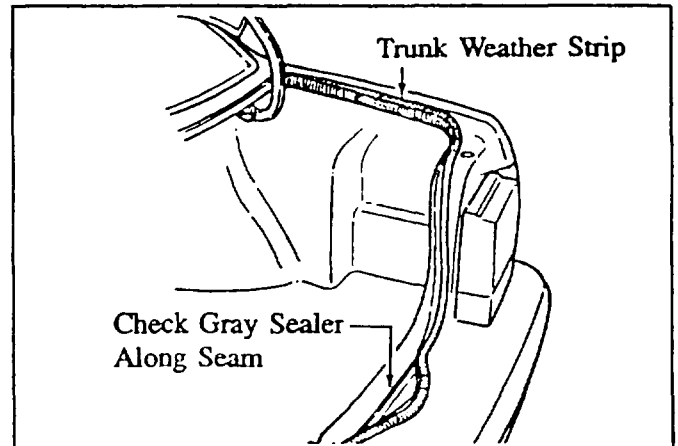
Checking Grey Sealer Under Trunk Weatherstrip
